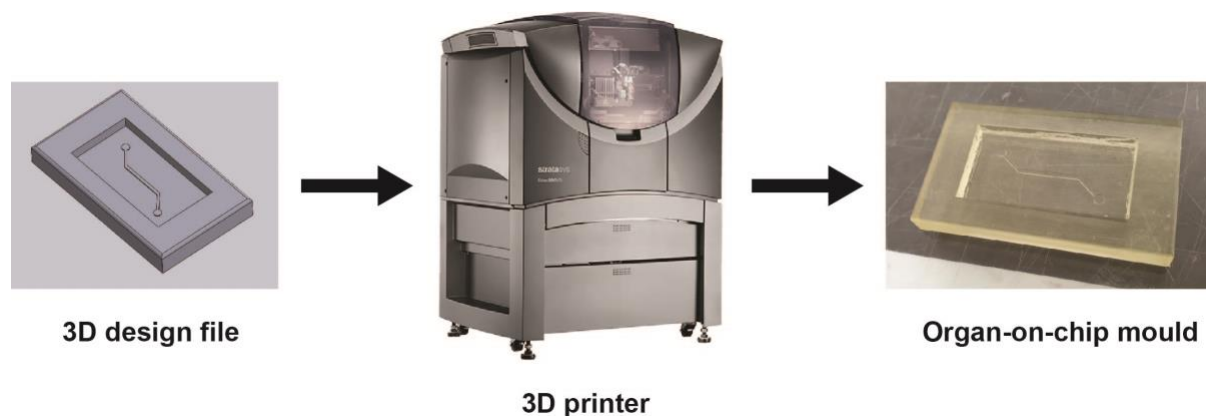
3D printing the organ-on-chip mould. The mould is drawn using a modelling software, such as SolidWorks®, then converted to a 3D printer-readable file (.STL format) and sent to a 3D printer for device printing.
